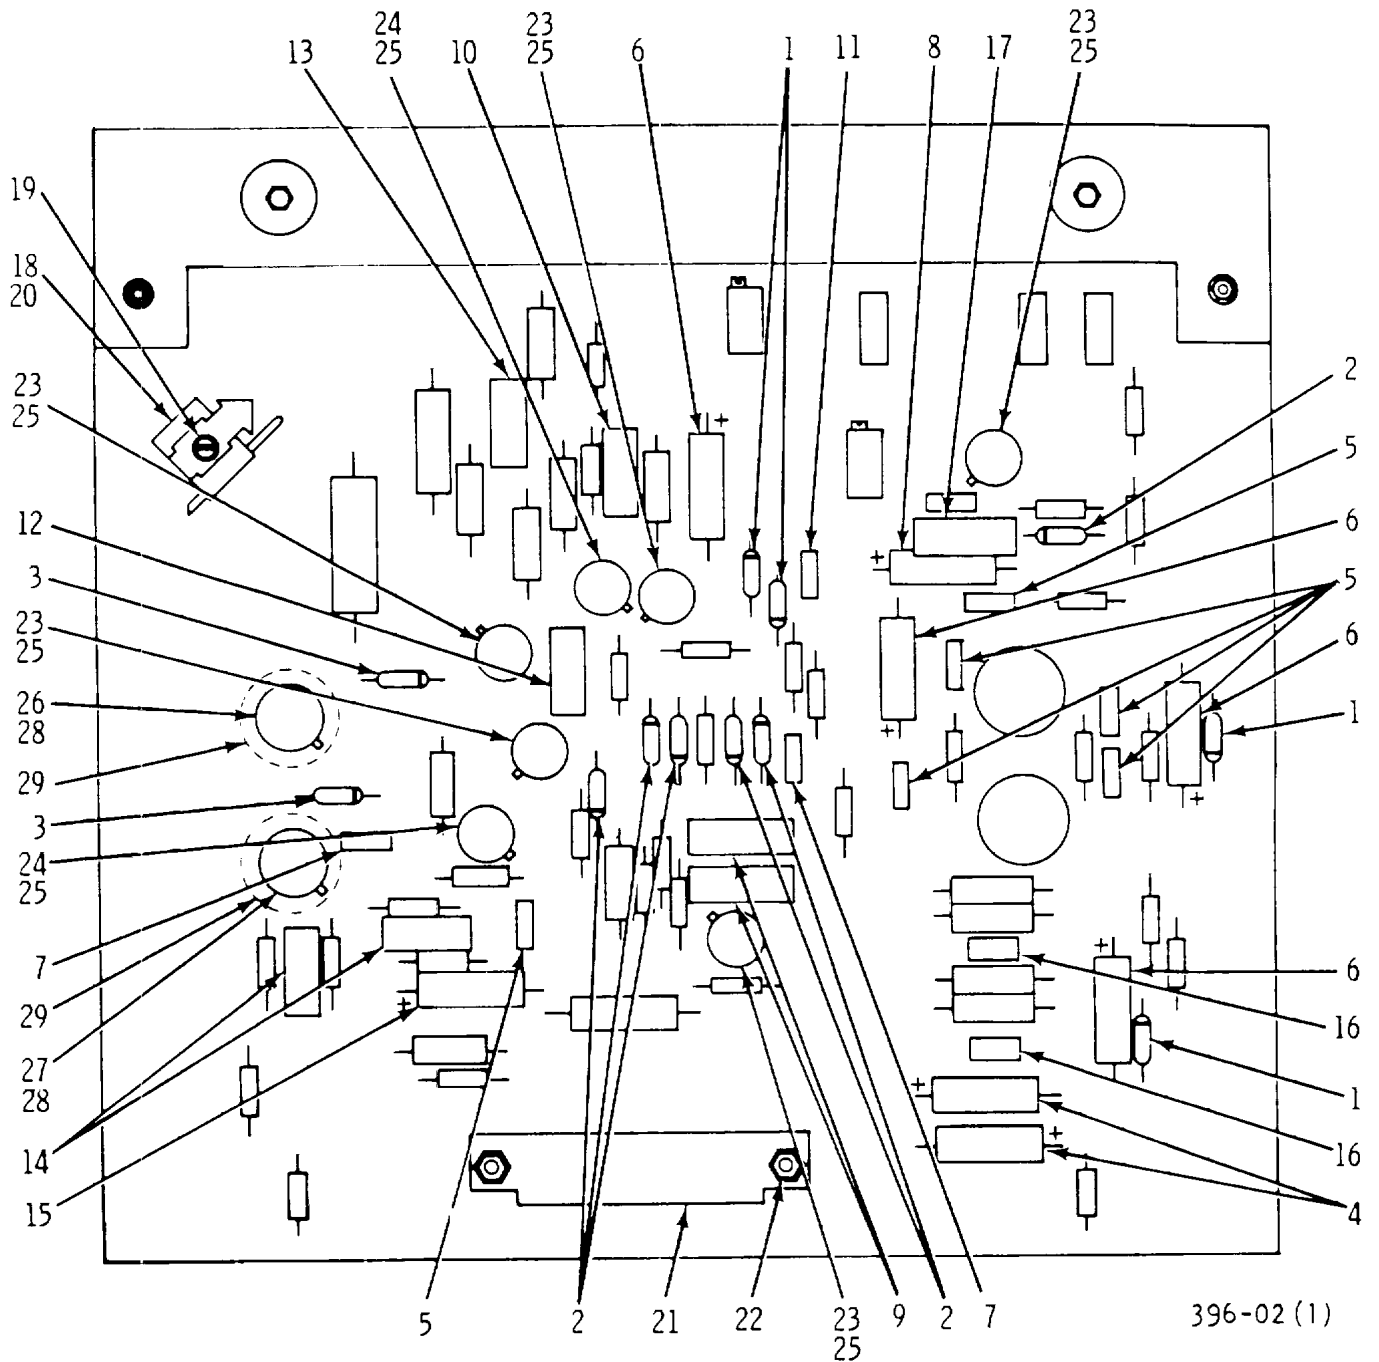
Circuit Card Assembly, Video Amplifier AI (Sheet 1 of 2)
